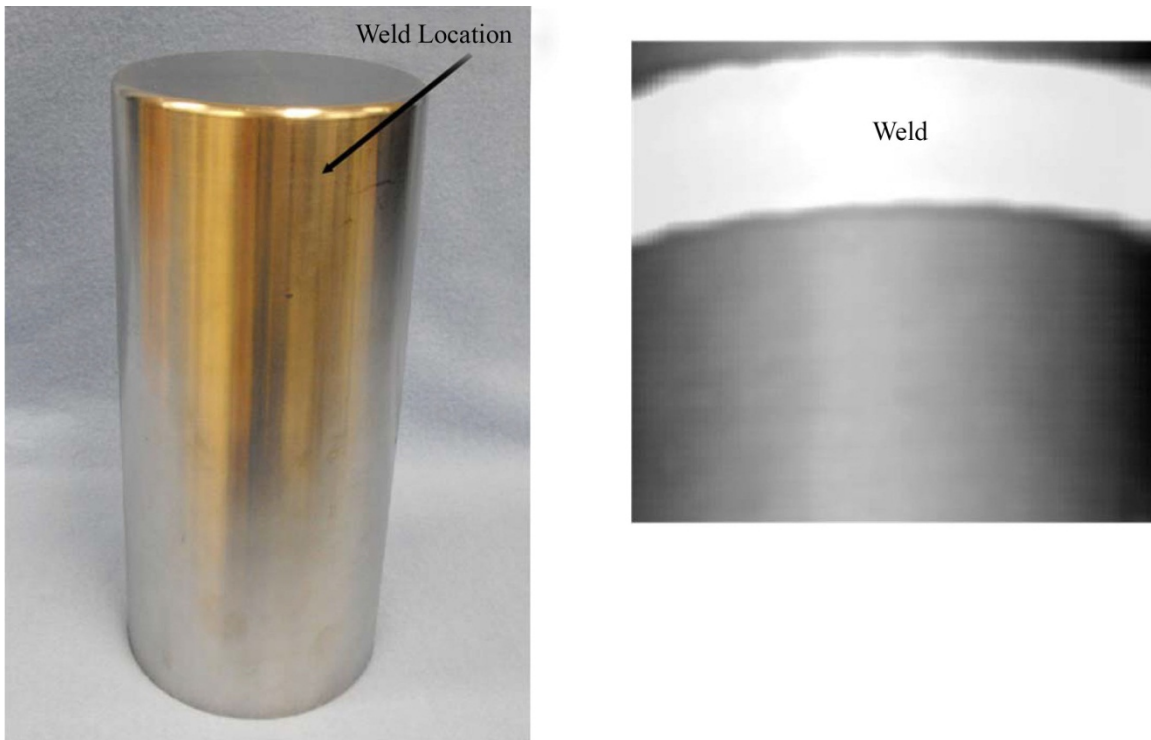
Weld in Stainless Steel Canister Imaged Using Eddy Current Examination
